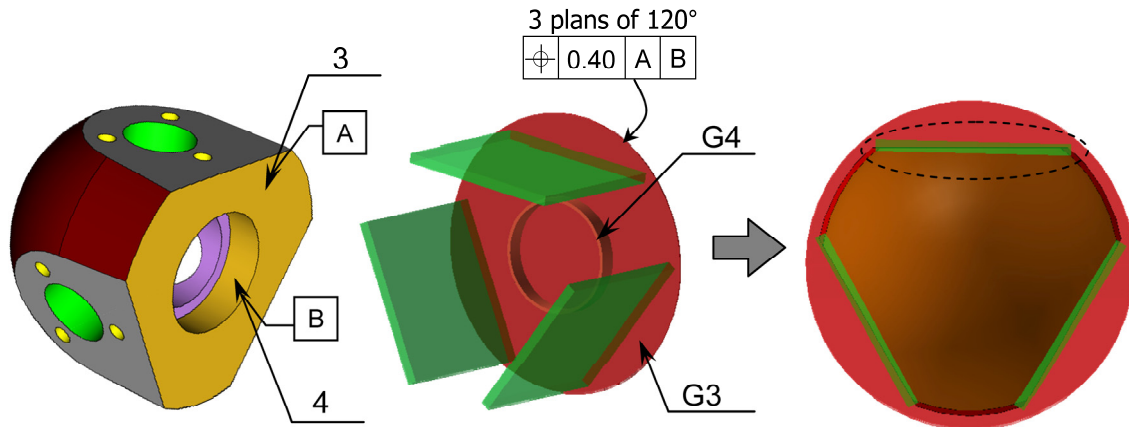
“Bolt” example, Gauge/MMP assembly
